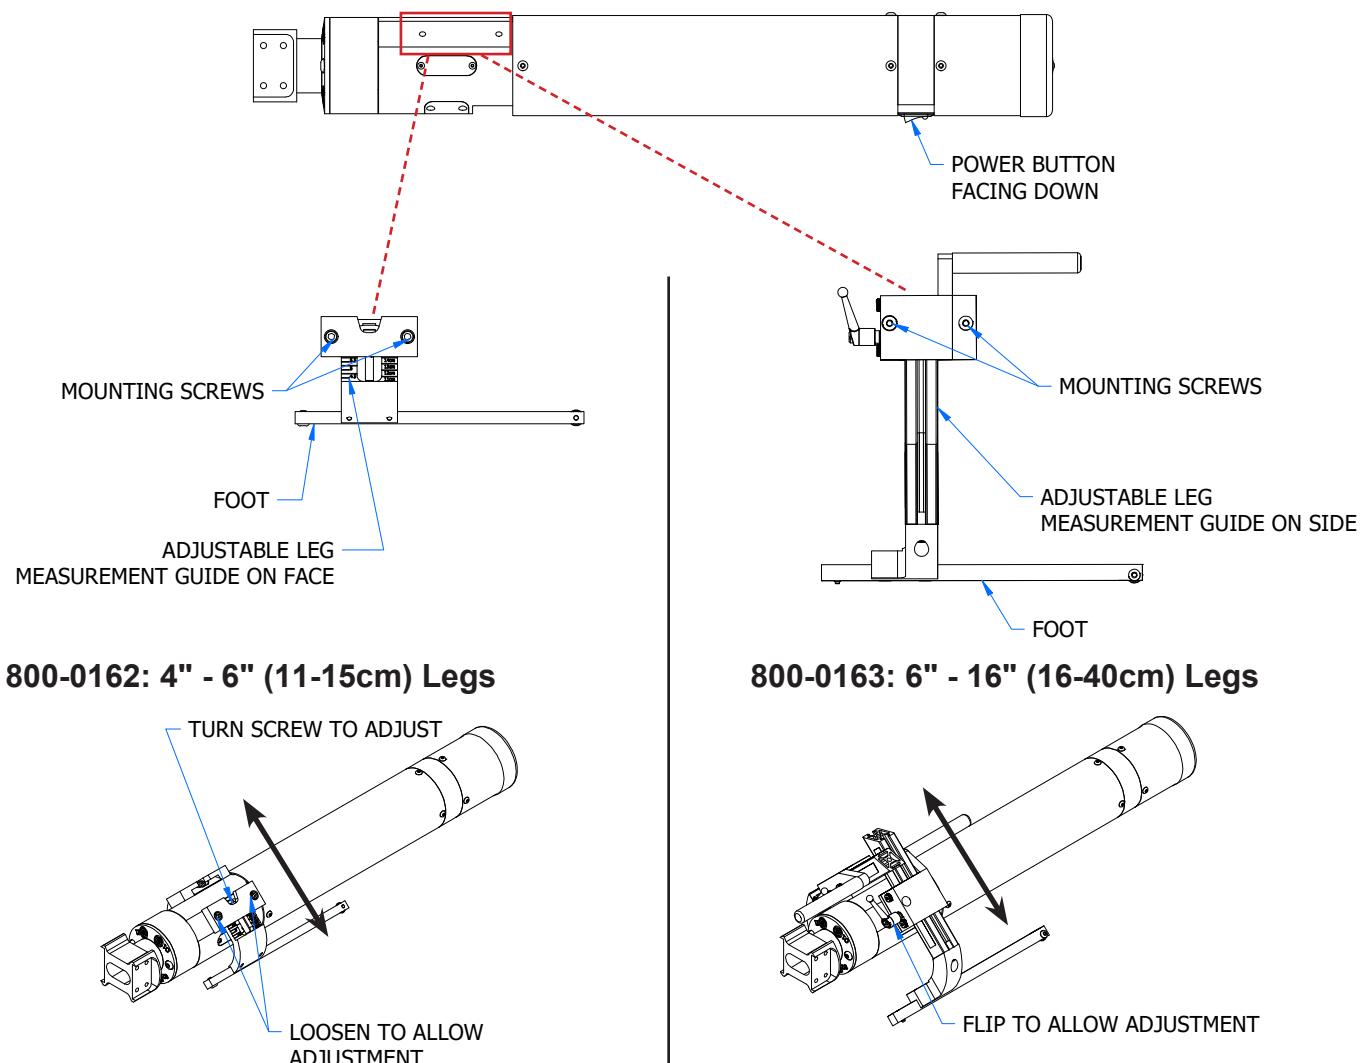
Attaching and Adjusting 4"-16"Ø Legs
